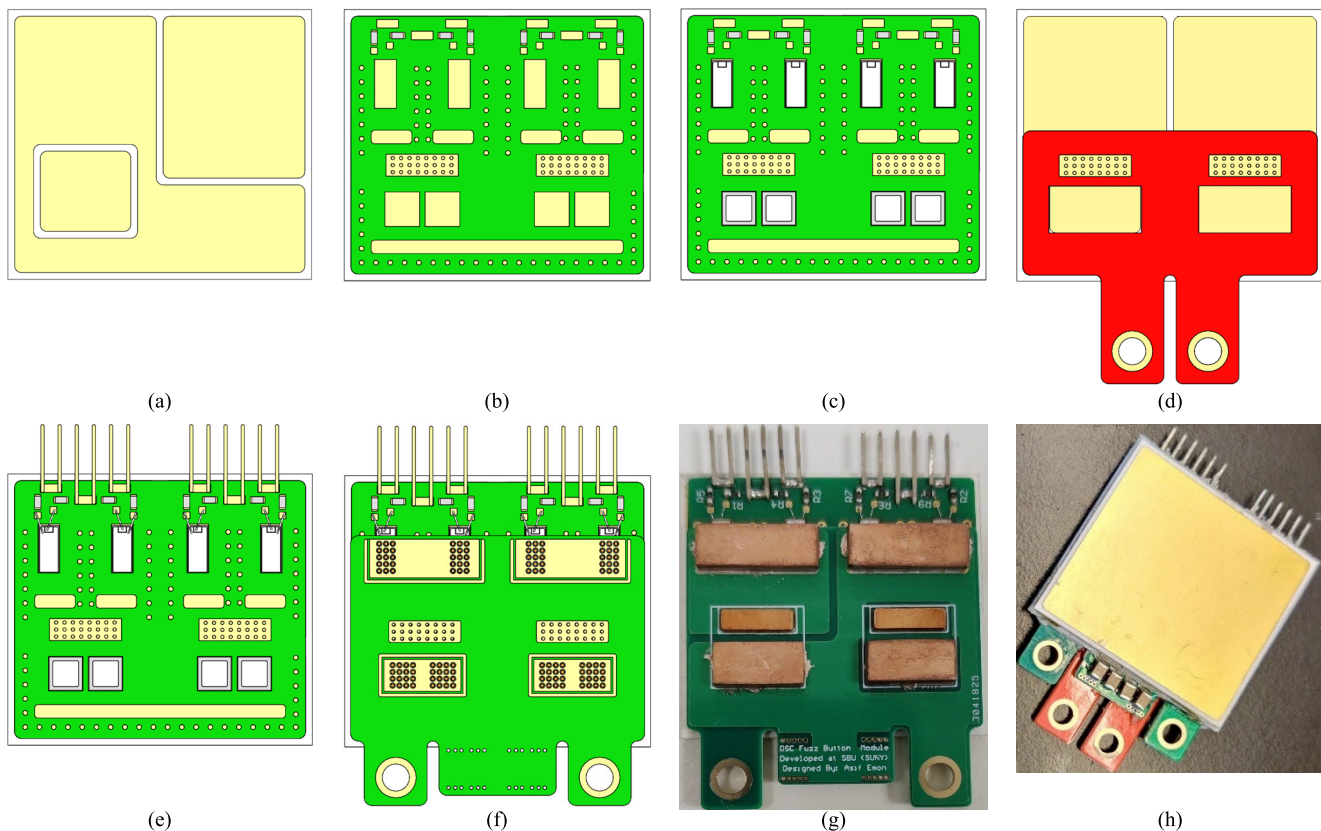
Fabrication steps of DSC module using fuzz button. (a) DBC (both top and bottom DBC shares the same design). (b) DBC and interposer PCB-1 aligned for reflow. (c) Bottom DBC, PCB-1, and dies attached after the first reflow. (d) Top DBC and ac PCB attached during the first reflow. (e) Wire bonding to establish gate connection. (f) PCB-2 is placed, and fuzz button is inserted. (g) Copper pillars are placed on top of fuzz button. (h) Top DBC and ac PCB are placed on copper pillars and second reflow is done.
